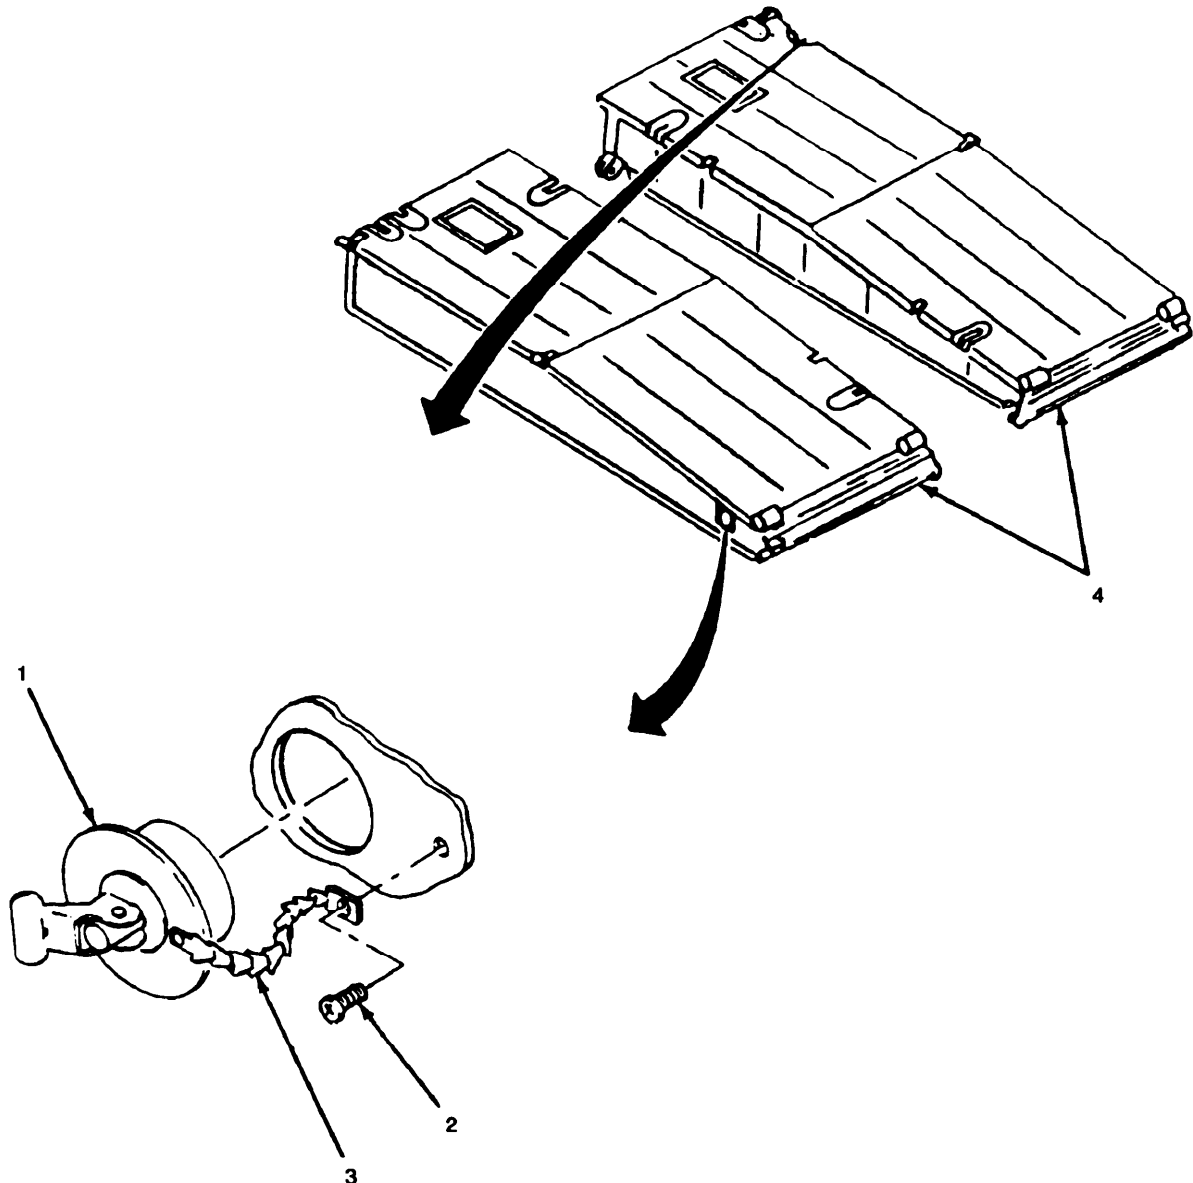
Ramp Bay Roadway Pontons, Repair
